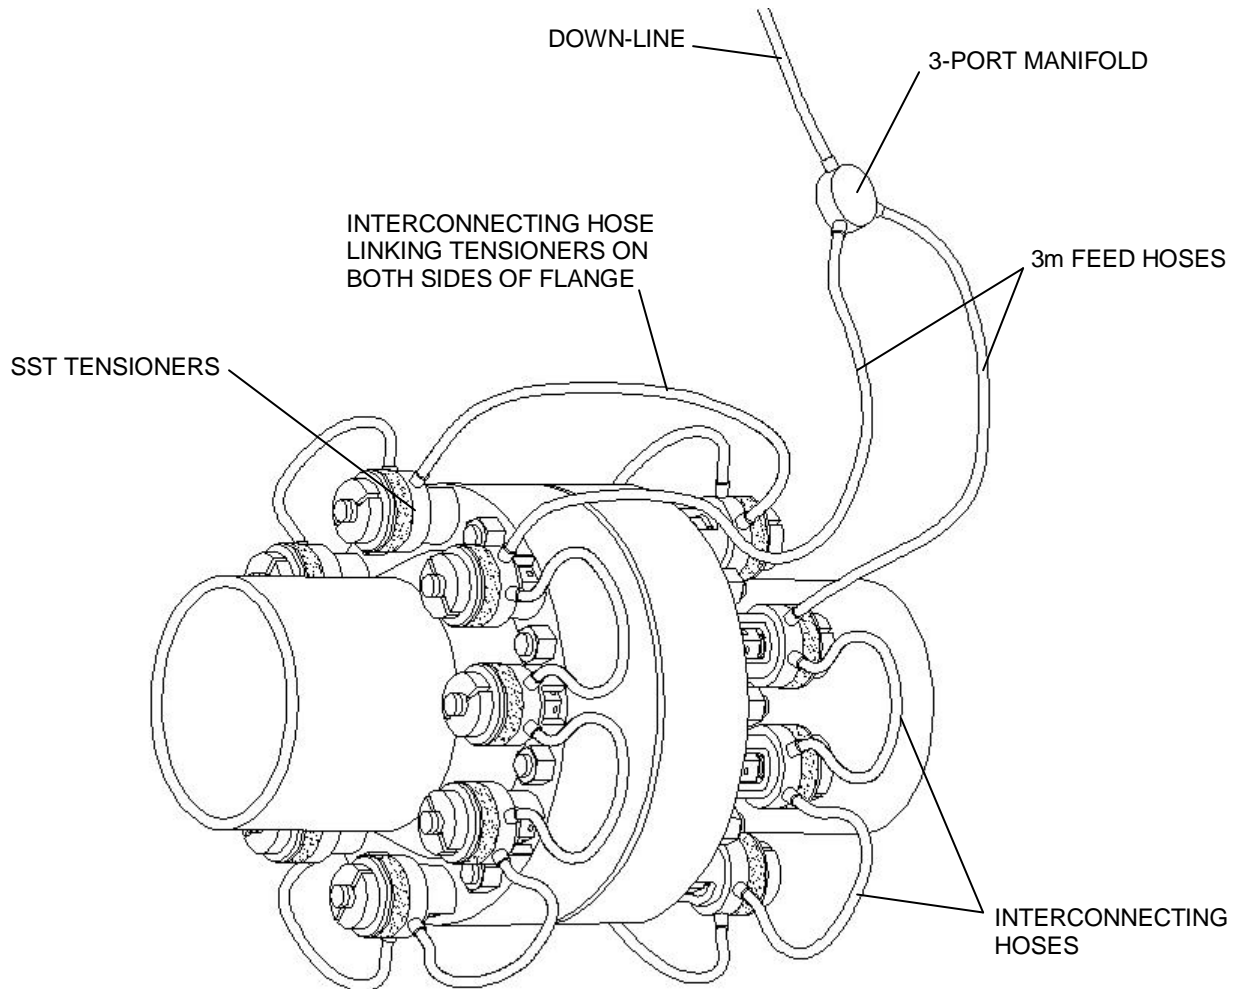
Typical hydraulic harness arrangement (100% tool cover)
